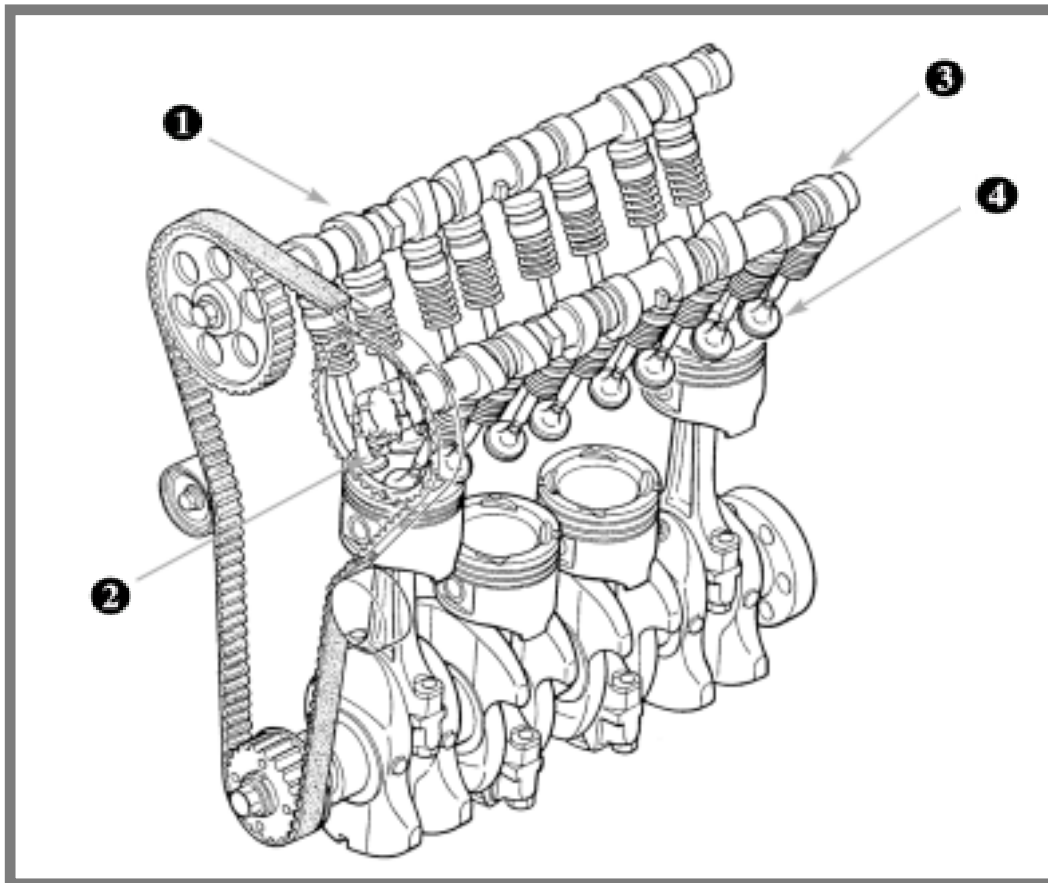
The dual overhead camshaft (DOHC) design uses separate camshafts for the intake and exhaust valves. Two camshafts are used on this 4-cylinder in-line engine
